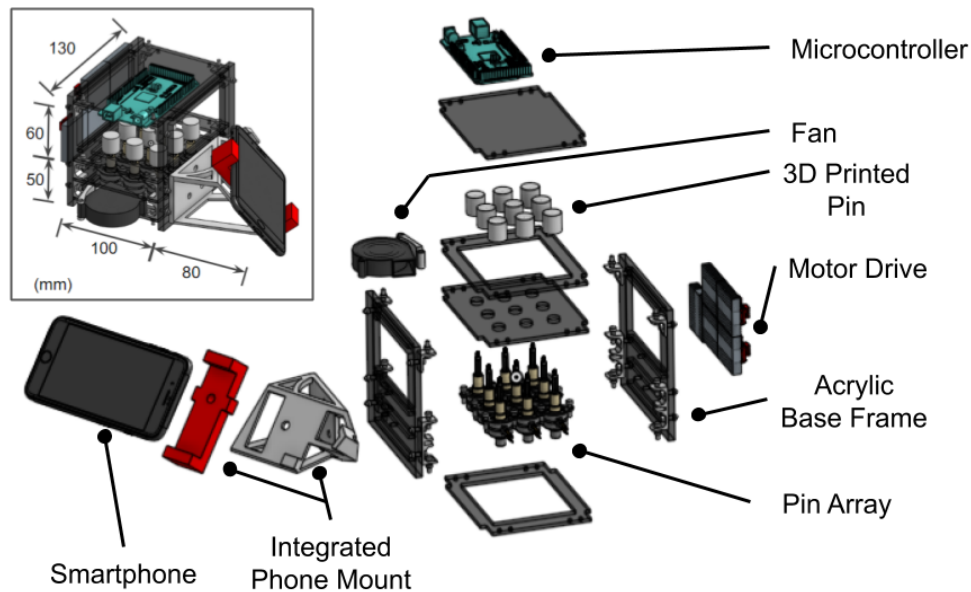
The dimensions and the exploded view of the device are shown here. The approximate volume and weight of the device, with an iPhone 7 plus attached, are $2.2 \times 10^6 \text{ mm}^3$ (2.2 L) and 1.2 kg. The device can be assembled with 3D printed connector with M3 screws and nuts.
